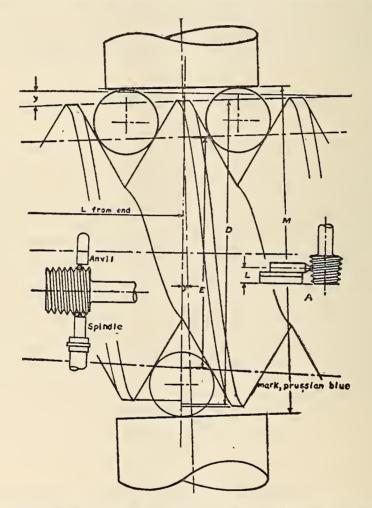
Measurement of pitch diameter of taper thread gages by the three-wire method
